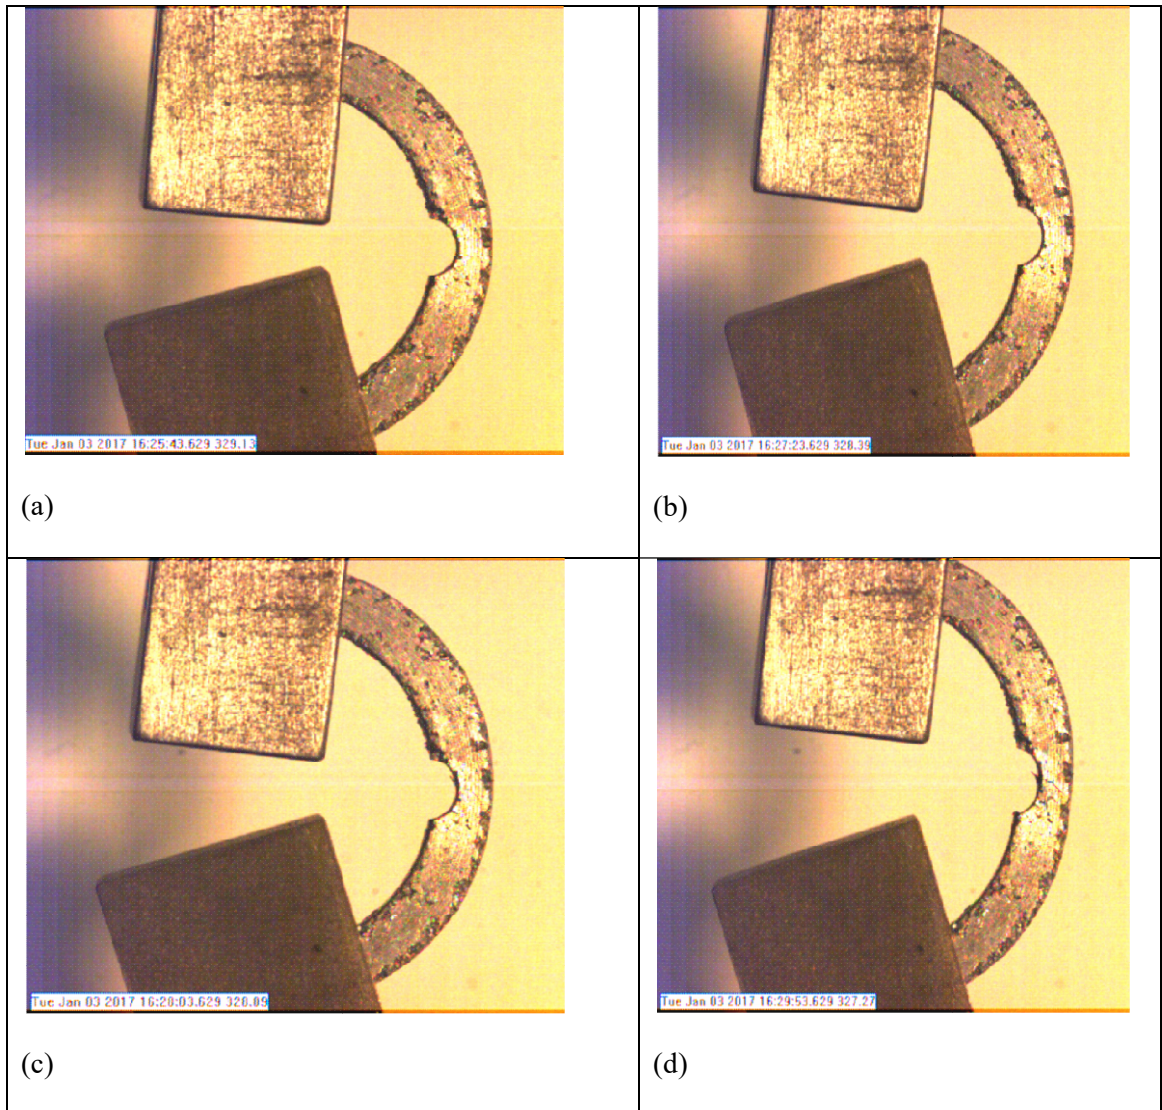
Several frames from the high-speed recording of the fracture toughness test of a ~400 micron nickel-aluminum powder (swaged with 12.7 mm core) ring with the loading fixtures attached at the top and bottom of the specimen: (a) frame captured from the beginning of the test; (b) frame captured at the onset of fracture; (c) frame captured just before complete fracture and failure; (d) frame showing the end of the test.
